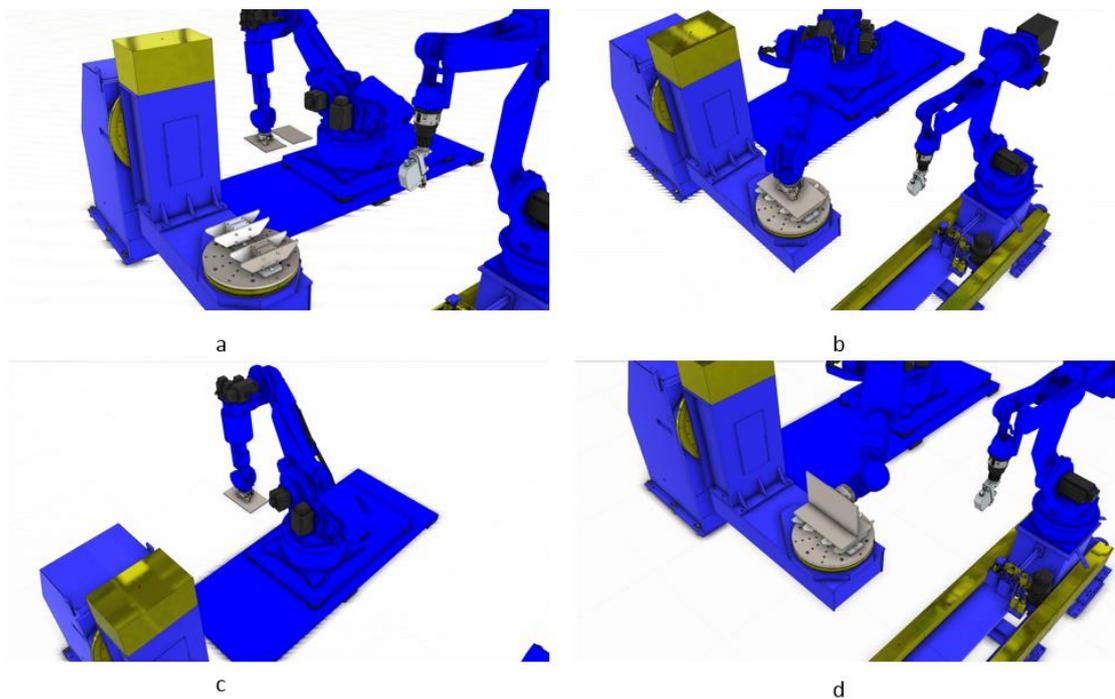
Phases of simulation. A) picking the first part of workpiece, b) releasing the part to the positioner, c) picking the second part of workpiece and d) locating the part to the positioner.
